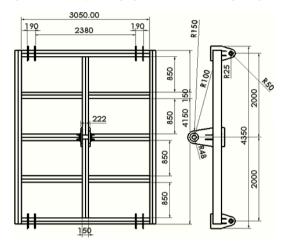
Detailed assembly of the proposed mainframe without patch plates
